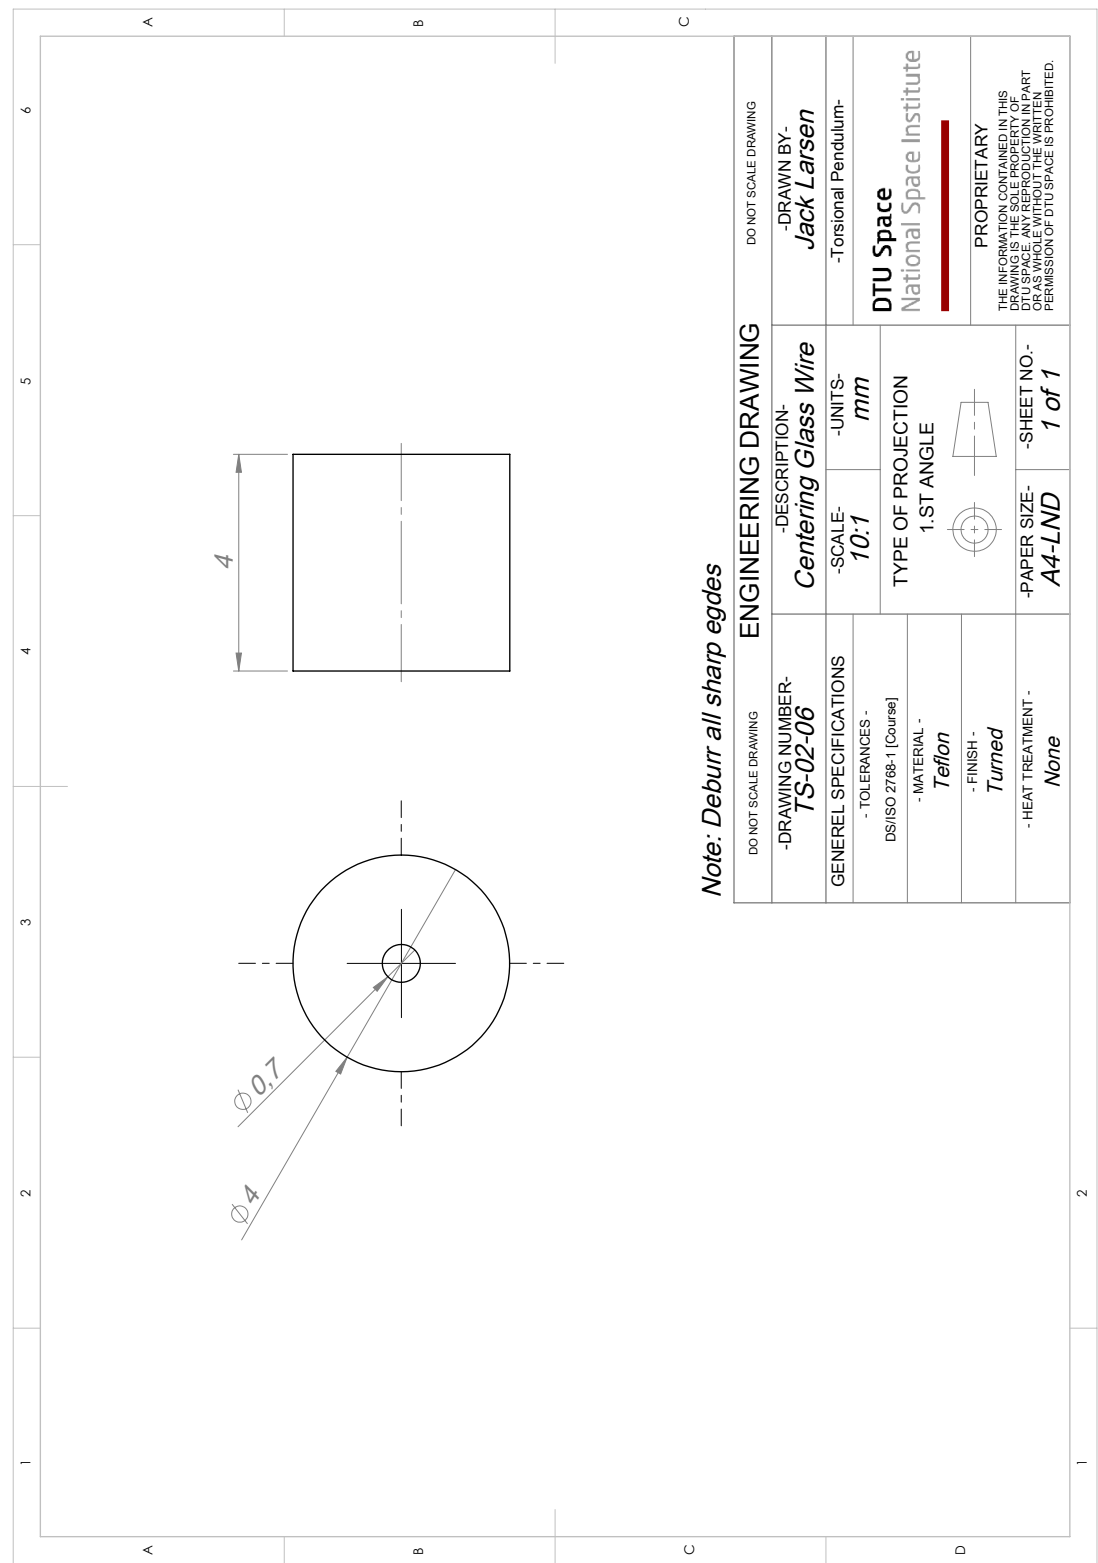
Test Setup: Centering bushing for centering the glass wire while curing the epoxy glue fixing the wire to the steel tube.
